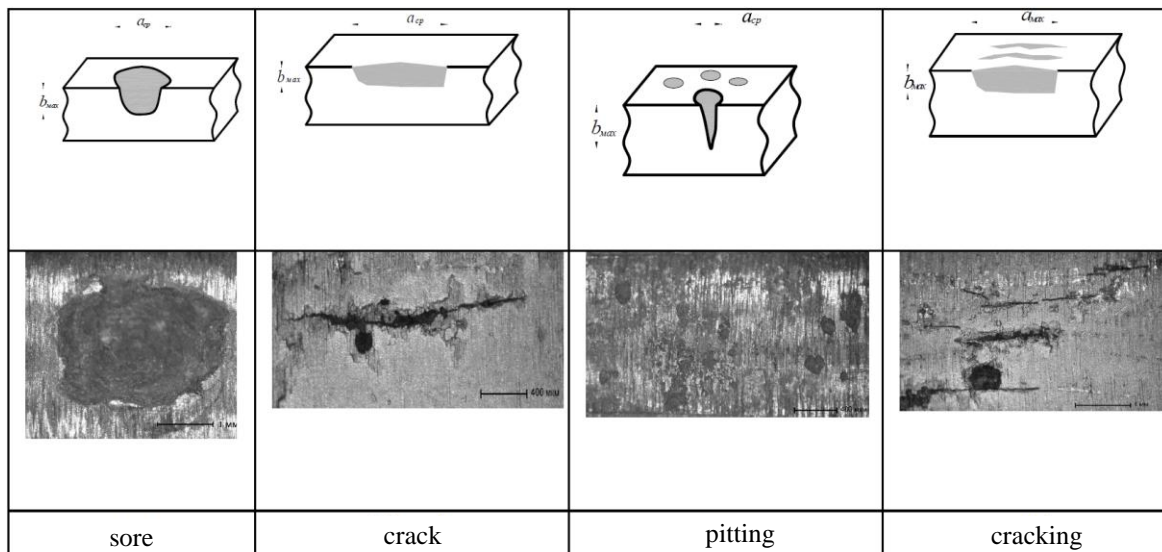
DEFECTS FOUND ON WWER SG TUBES [9]
